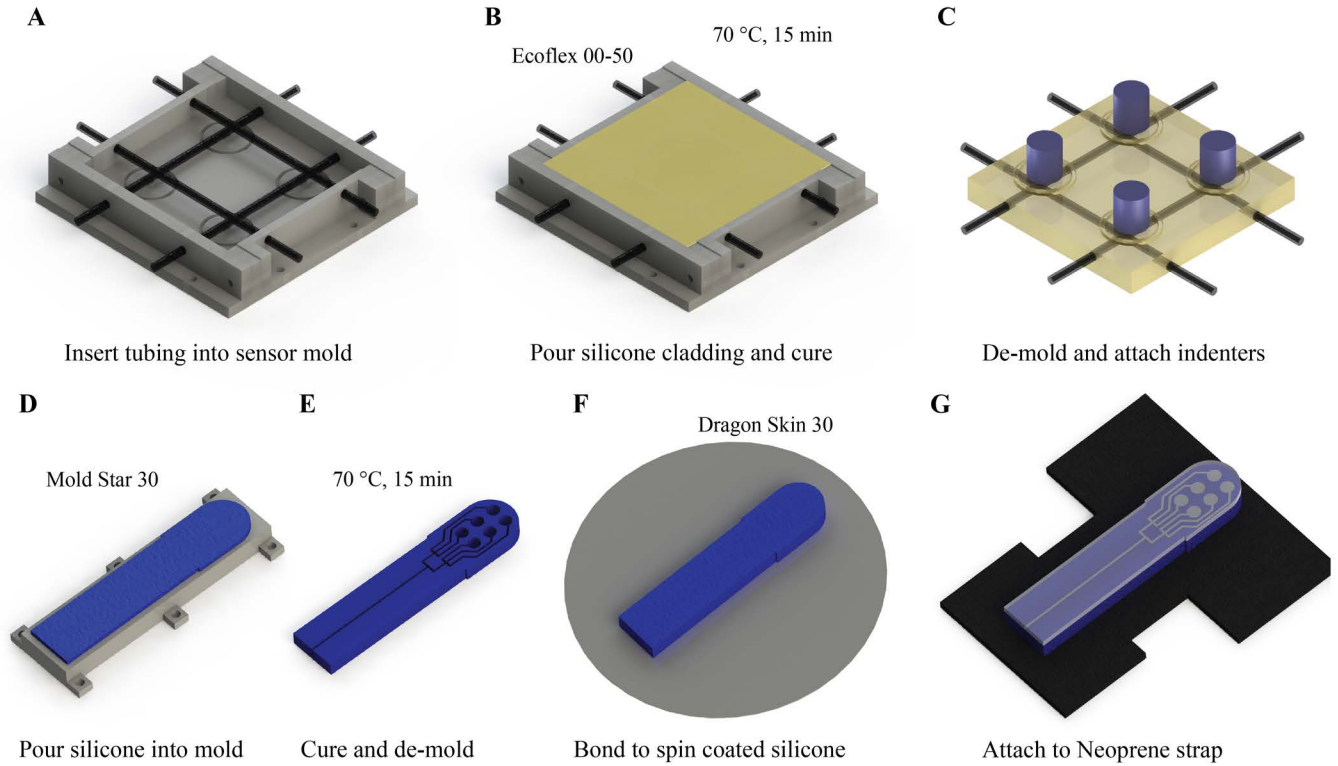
Top* - Soft Optical Palpation Sensor Fabrication. A) Align tubes within 3D printed mold. B) Pour silicone elastomer into mold and cure. C) De-mold sensor and attach indenters. *Bottom*- Actuator Fabrication for the wearable haptic glove. D) Pour silicone into actuator base mold. E) Heat cure and de-mold actuator base after curing. F) Spin coat silicone membrane onto silicon wafer and bond actuator base. G) Cut out the silicone actuator and glue to fabric straps.
